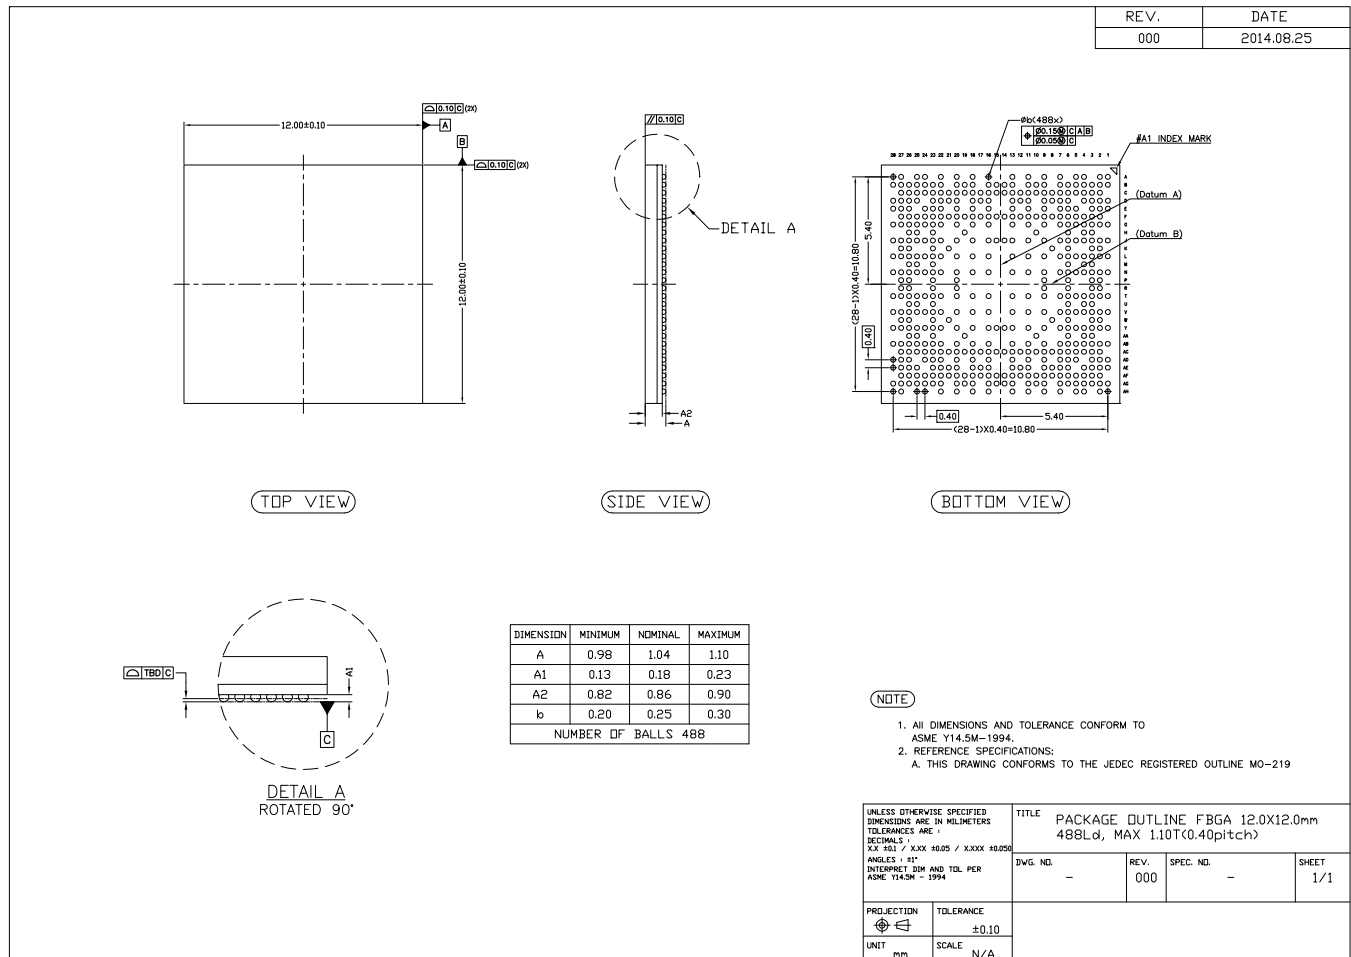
12 x 12 mm BGA, Case x Package Top, Bottom, and Side Views
